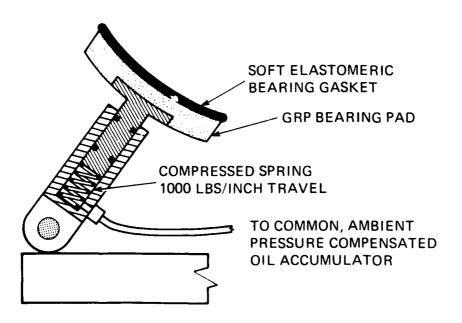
Concept of a mounting providing a secure, but shock-mitigating attachment to the frame.
